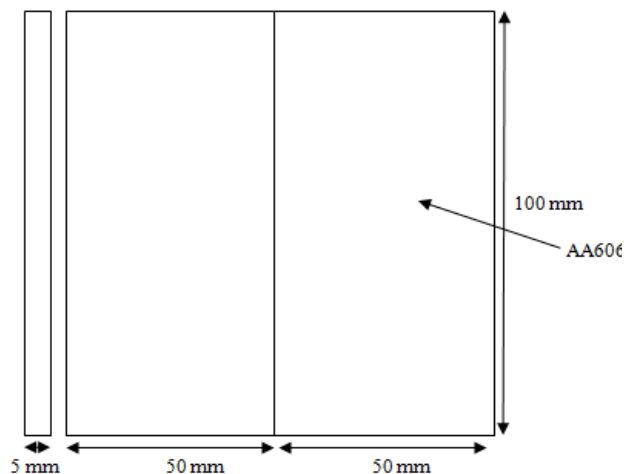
Square butt joint for Friction Stir Welding
